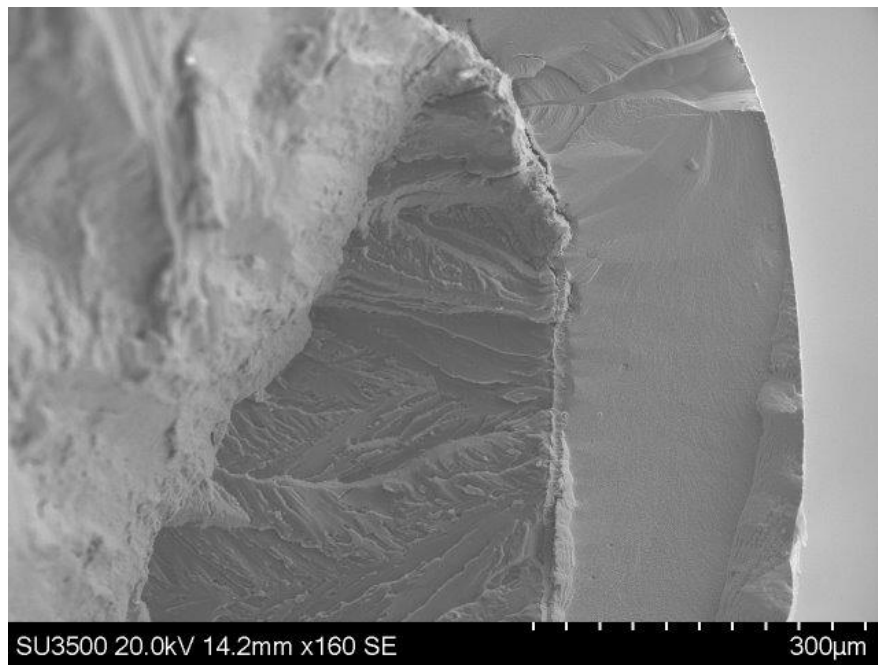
Coating feature at Location C in the fracture surface of Specimen H1.
